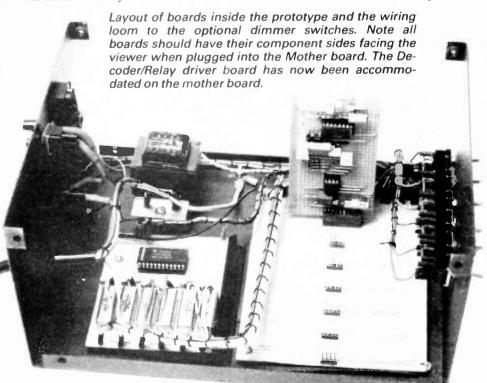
Suggest component layout inside the case. The mains transformer is mounted on a piece of stripboard and cuts made in the copper strips around the board spacer fixings and between secondary and primary windings
